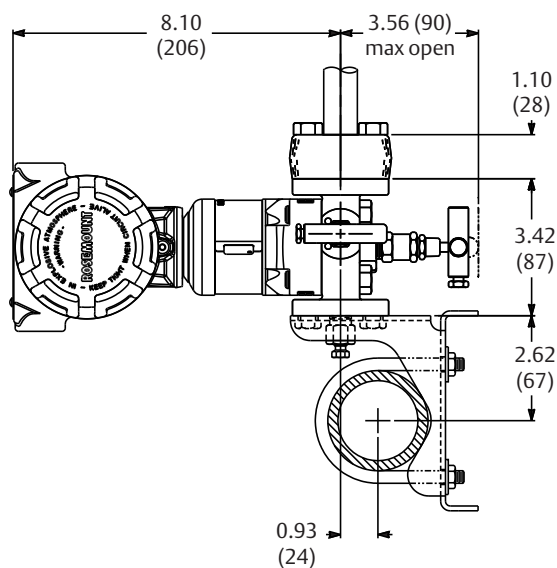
Plantweb Housing with Coplanar SuperModule Platform and Traditional Flange
